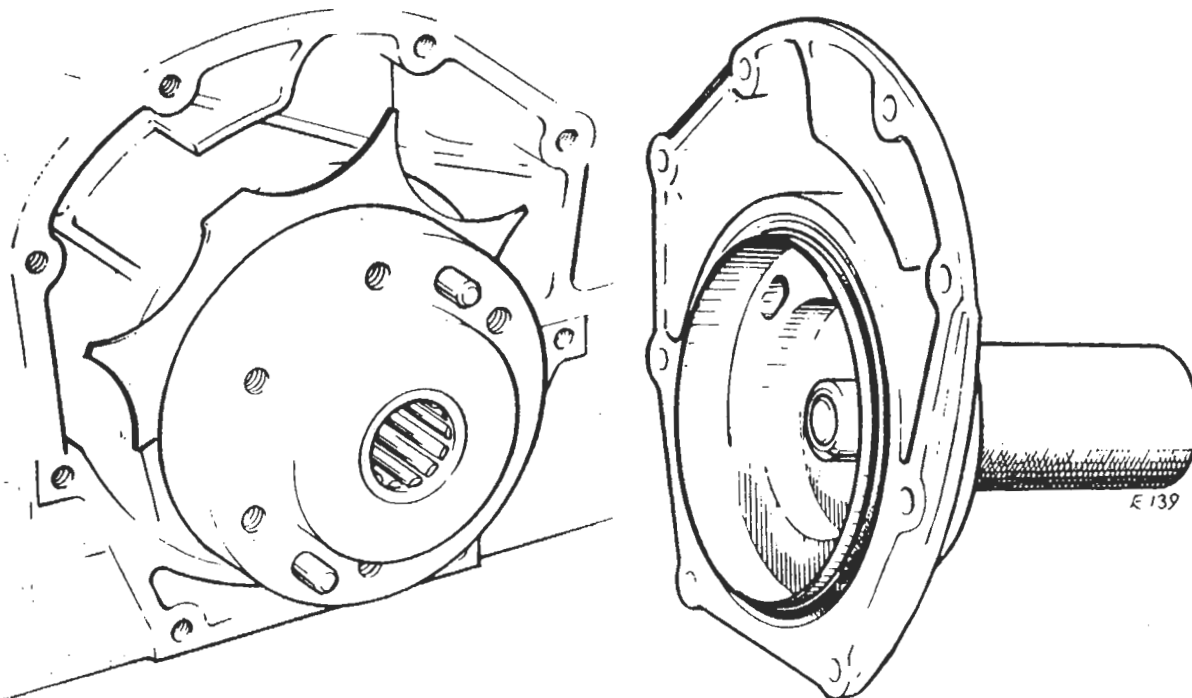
Using Tool '84A' to fit rear oil seal housing
